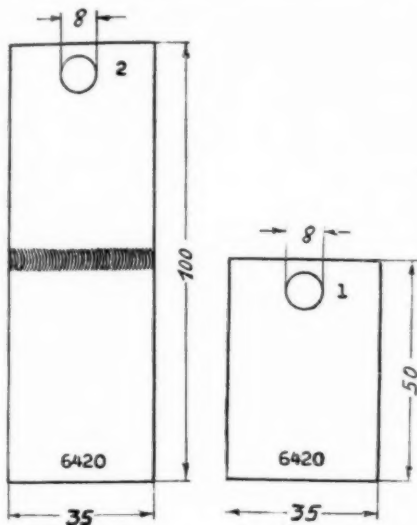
Specimens for welding test (left) and for sound and bend tests (right).
